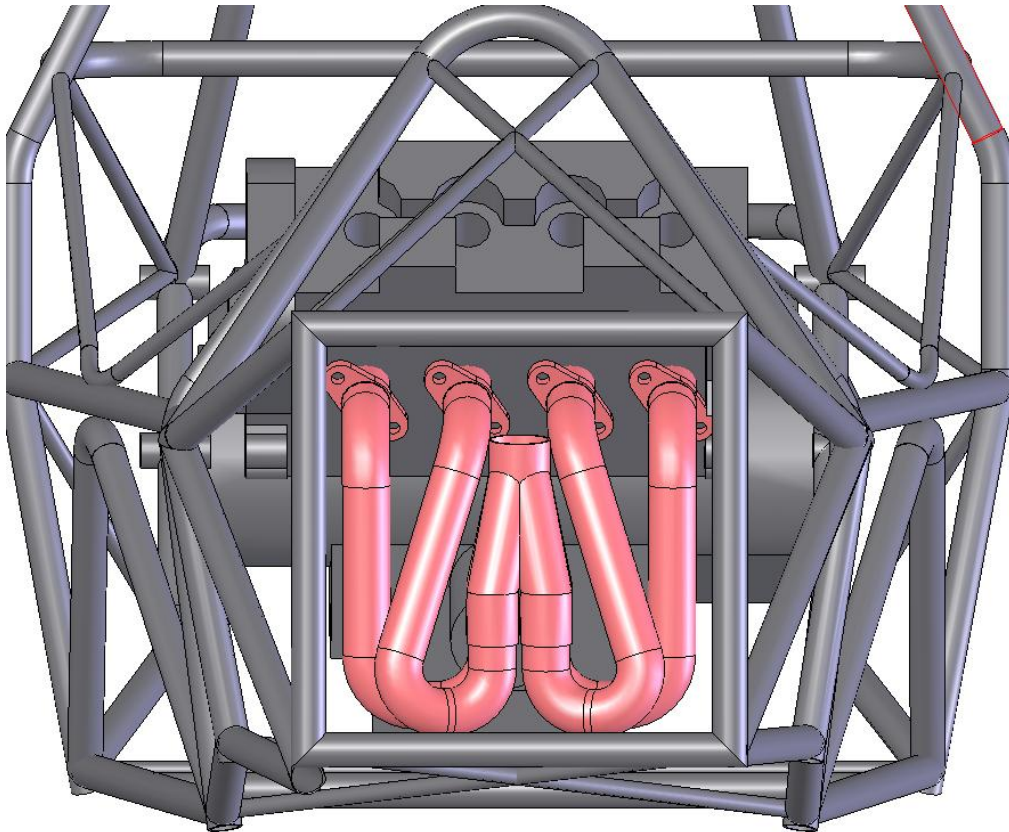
Designed exhaust manifold. (Modeled by D. Curran, engine/chassis by FSAE team)
